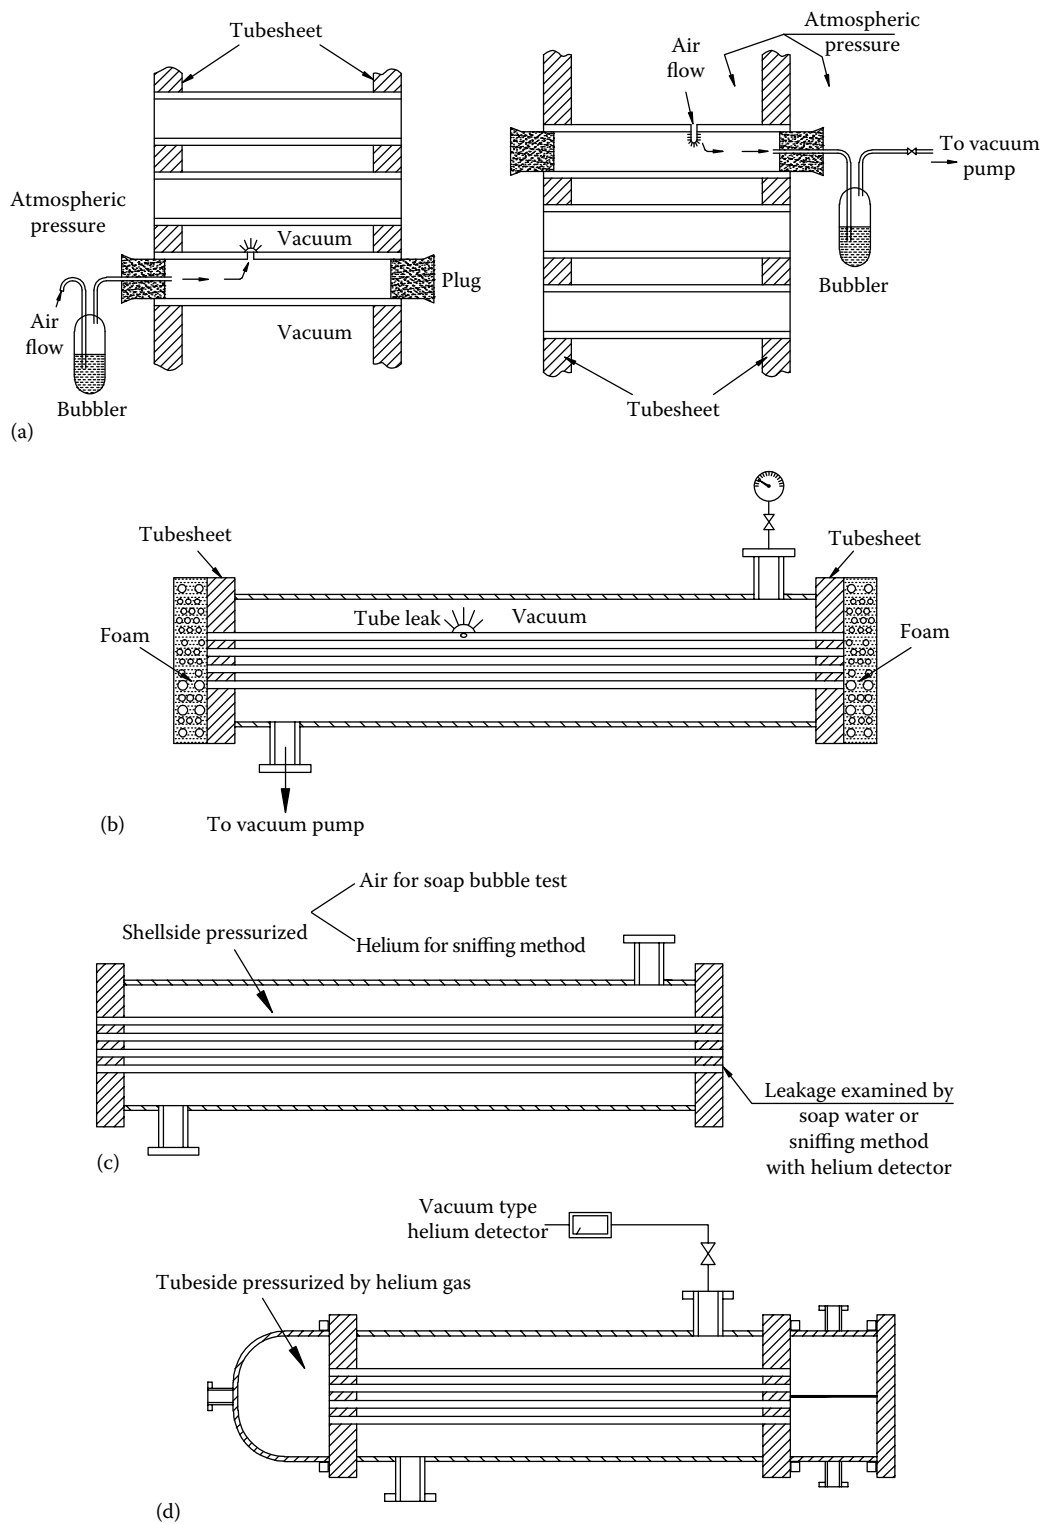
In-service examination of leaks: (a) by vacuum technique using bubbler and (b) by vacuum technique using soap foam, (c) pressure testing using soap water by sniffing method with helium detector and (d) pressure testing with vacuum type helium detector.
